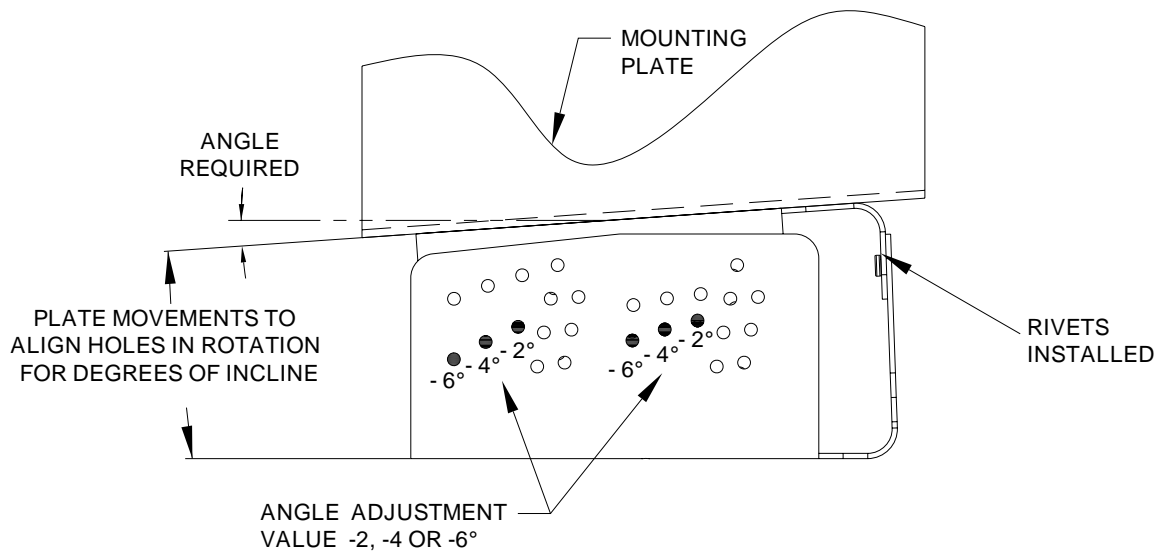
GMU 44 Universal Mount Hole Alignment, Rotational Method (Bottom Plate Mounted)
